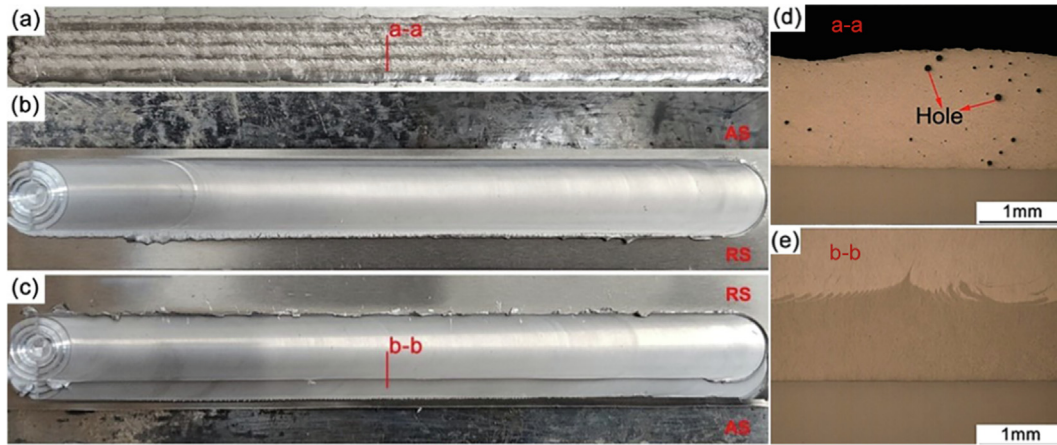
The weld appearance of (a) interlayer, (b) S1 and (c) S5; the cross-section morphology of (d) a-a cross-section and (e) b-b cross-section.
